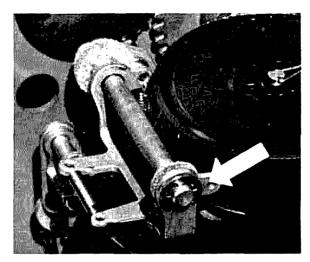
The retaining ring at the rear of the left spool is also removed to take off the ribbon holder.
